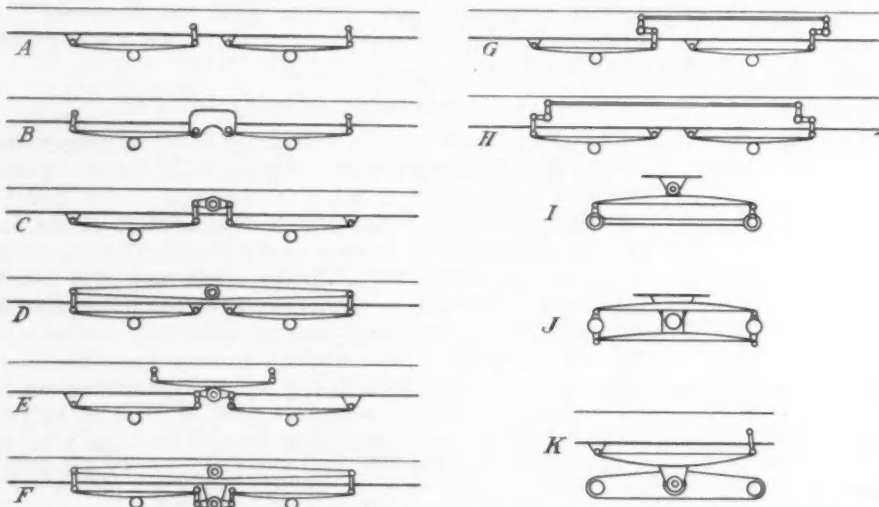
SPRING-SUSPENSION ARRANGEMENTS OF SIX-WHEELER VEHICLES
